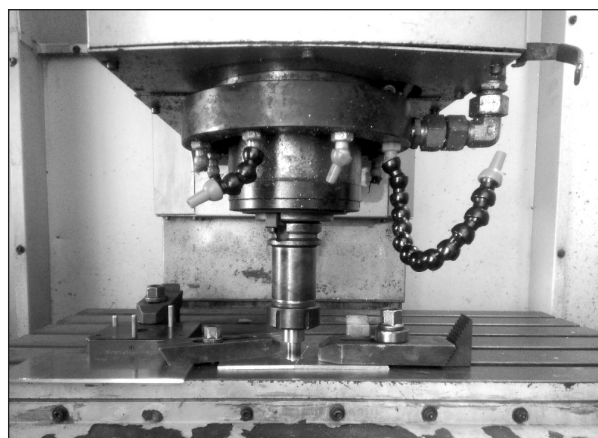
CNC J55 Vertical milling Machine FSW setup.
